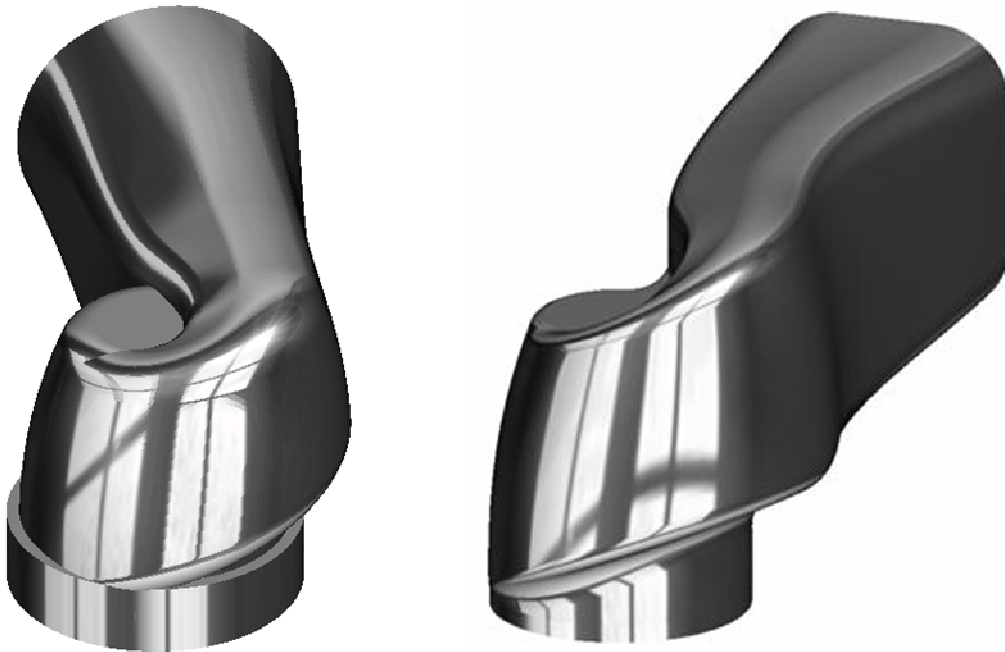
Helical port core (left hand: initial design, right hand: final design)
